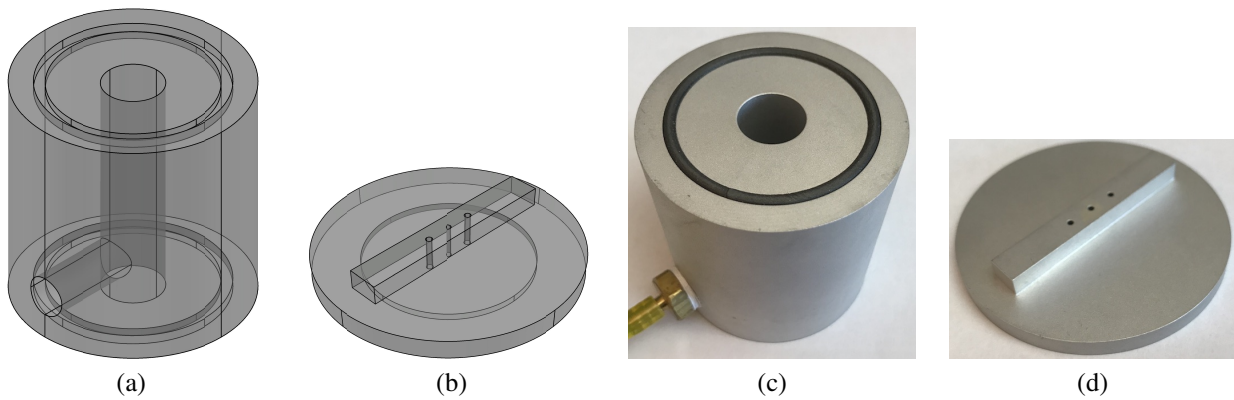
(a,c) CAD and photo of the vacuum work holder base. A black rubber gasket is pressed into the machined grooves on the top and bottom of the base unit. (b,d) CAD and photo of a representative top plate machined for DIP packages. This top plate was also used to for wire bonding the silicon array substrate to the flex PCB because of the suitable spacing of vacuum holes.
